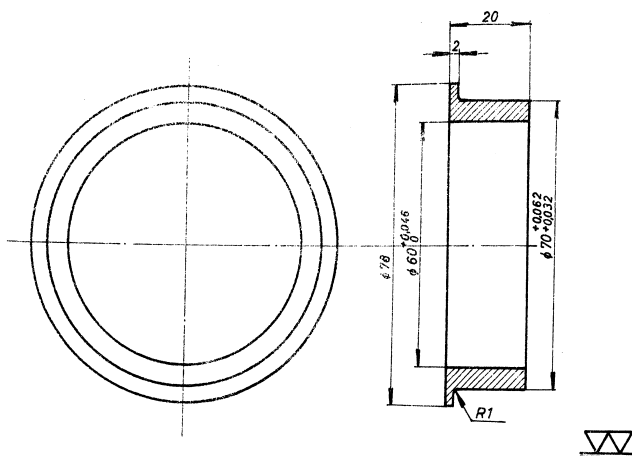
BRONZE BEARING — ELEVATING MECHANISM
